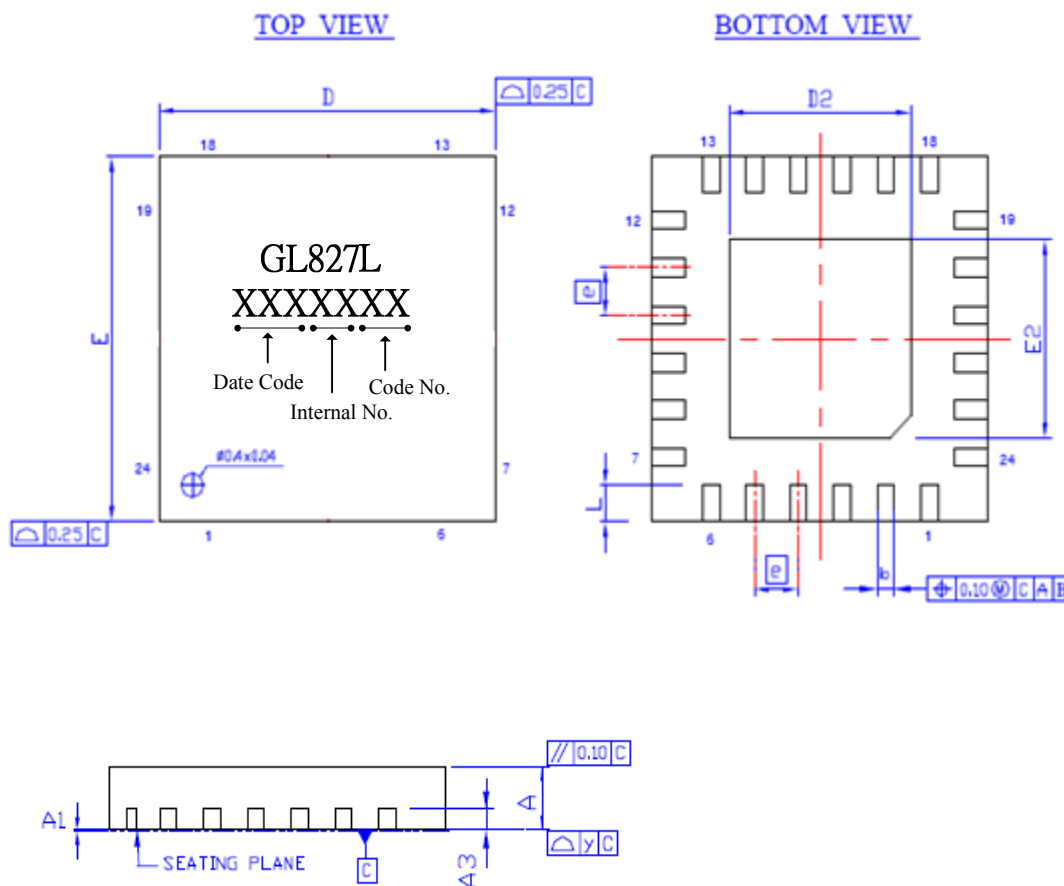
GL827L 24 Pin QFN Package (For 827L-01 and 827L-02 version only)
